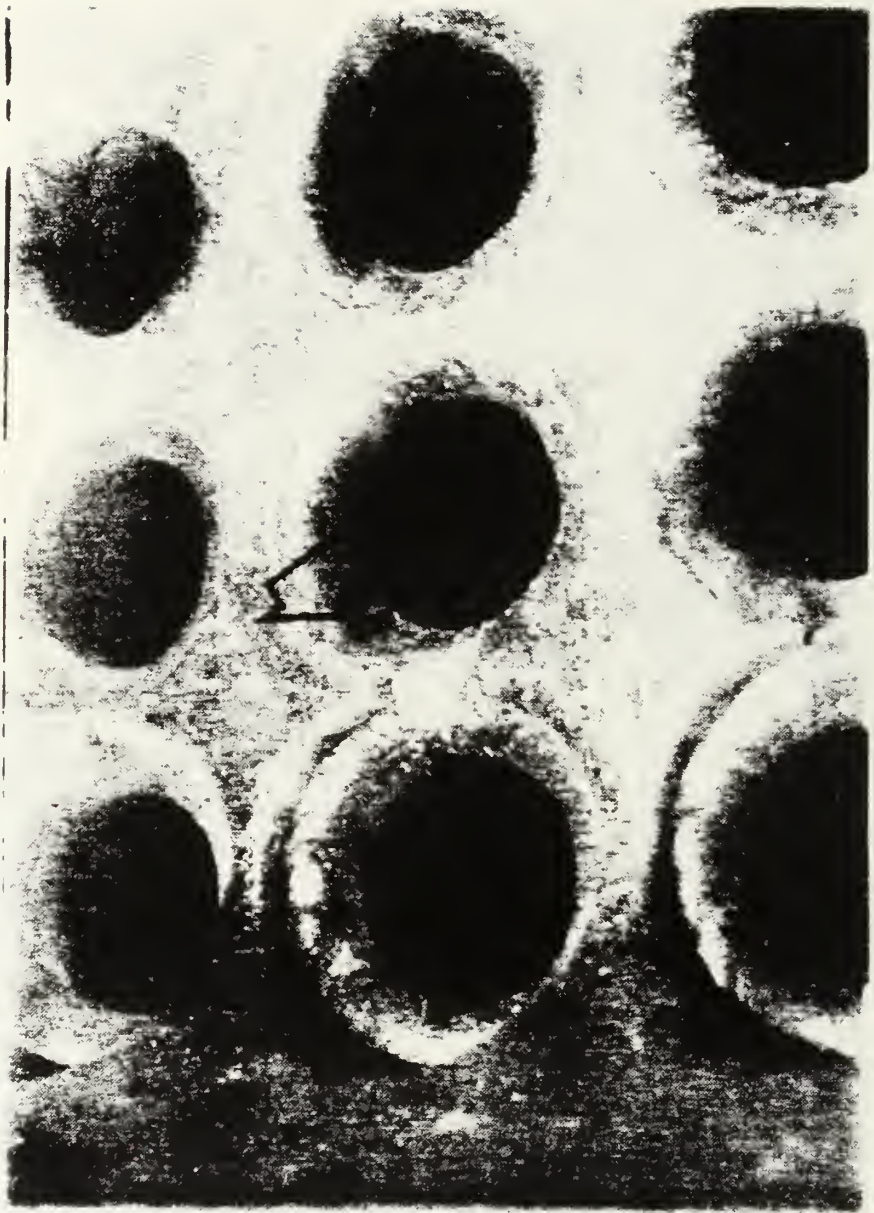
Magnetic Particle Indications of Ligament Cracks in No. 1 Boiler Inlet Outlet Header.
